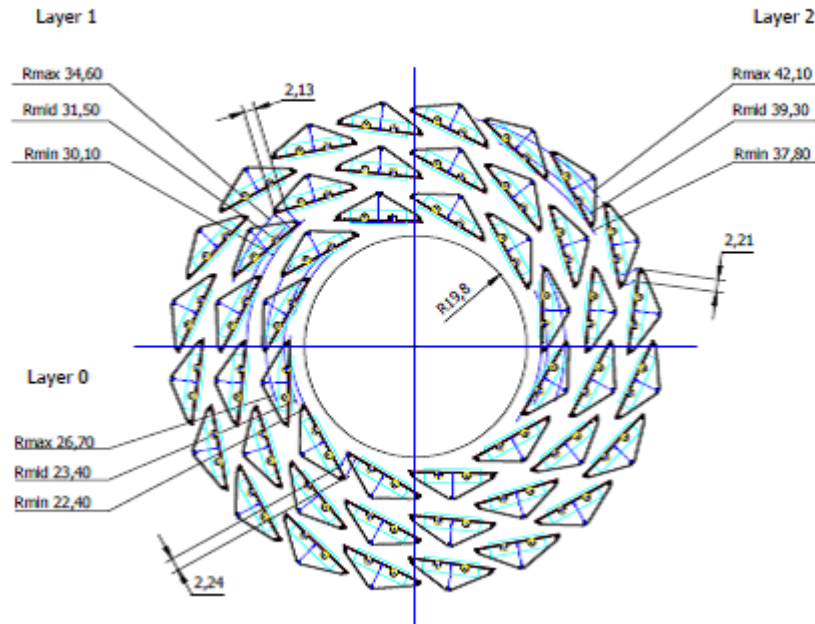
Cross section of the three layers composing the ITS Inner Barrel surrounding the beam pipe (mm).
